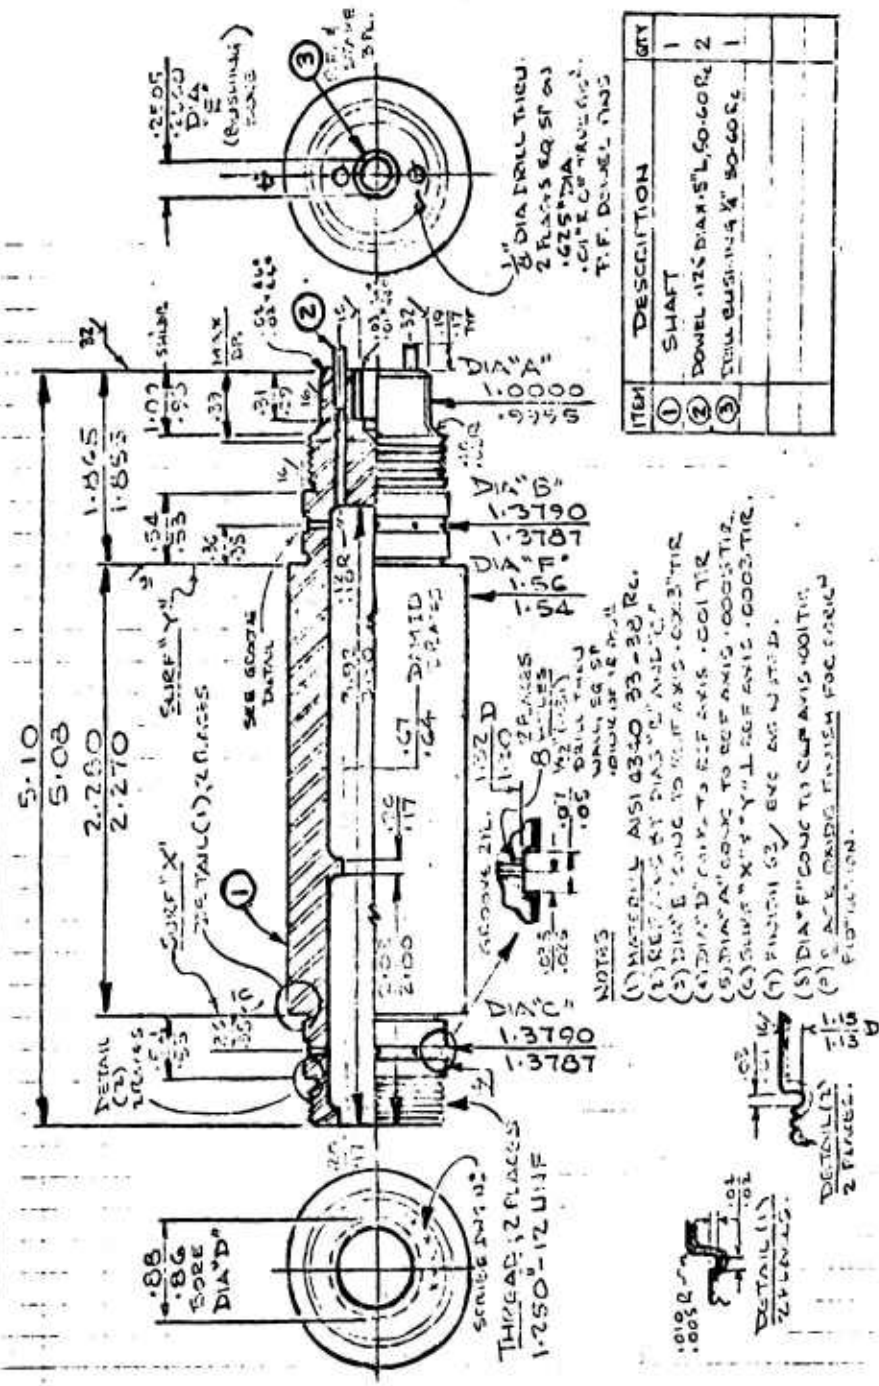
Second Modification Drive Shaft - 35MM High-Speed Bearing Tester
